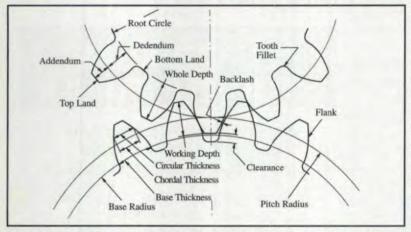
Gear design nomenclature. Courtesy of Van Gerpen and Reece Engineering.
